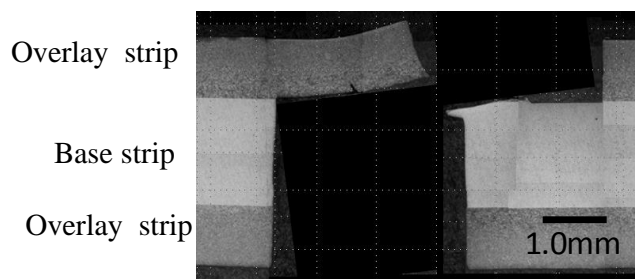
Cross section of the fractured specimen after tensile shear test.
